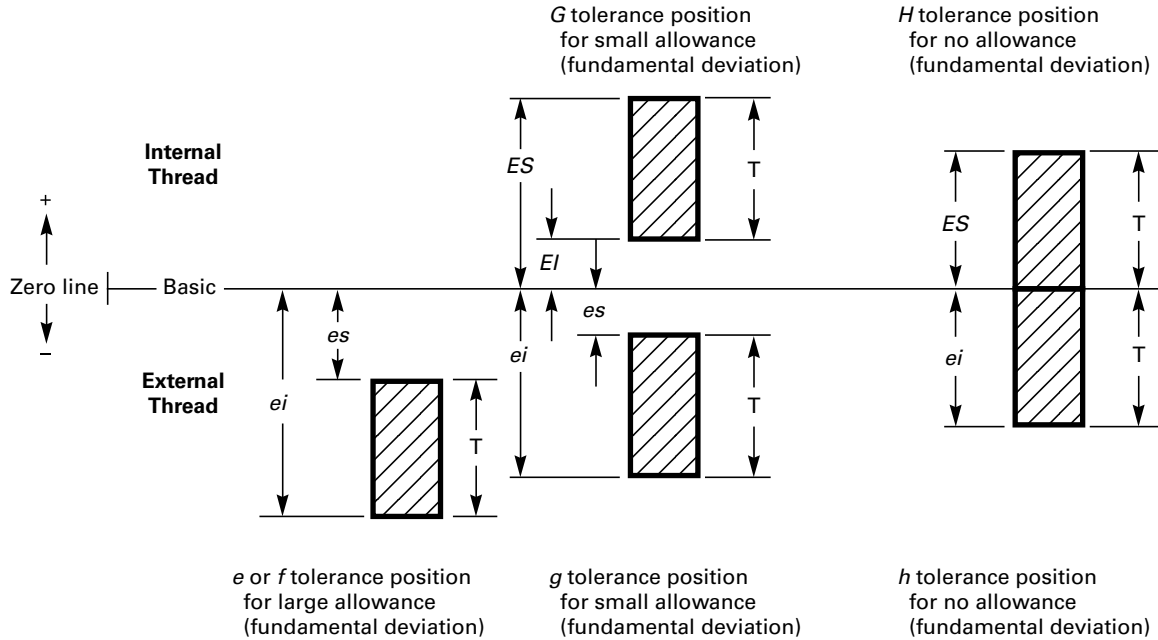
Metric Tolerance System for Screw Threads
